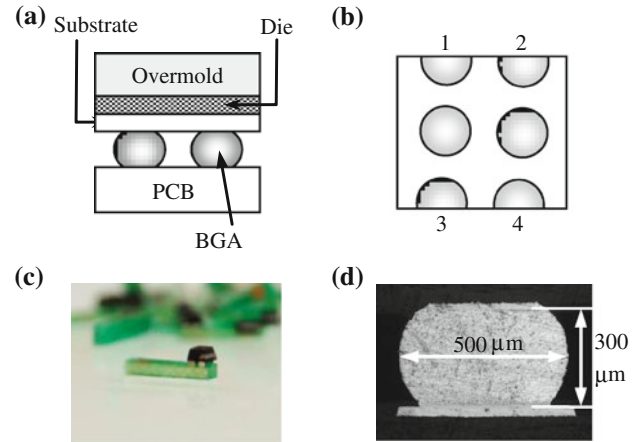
Test vehicle: (a) front view, (b) top view of the sample, (c) picture of the sample, and (d) polished surface of the solder joint.
